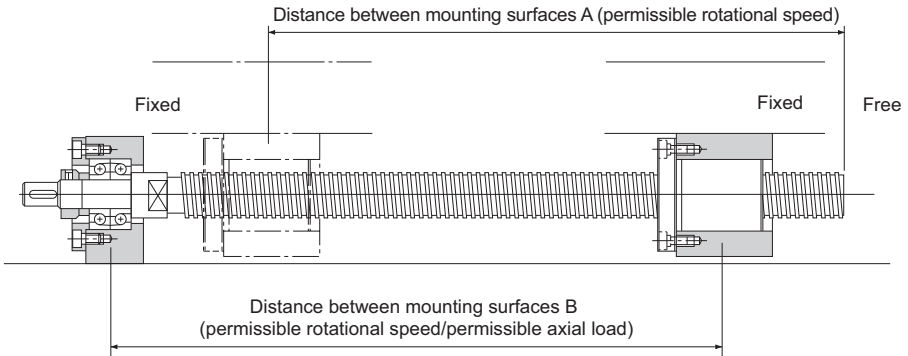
Screw Shaft Mounting Method: Fixed - Free
